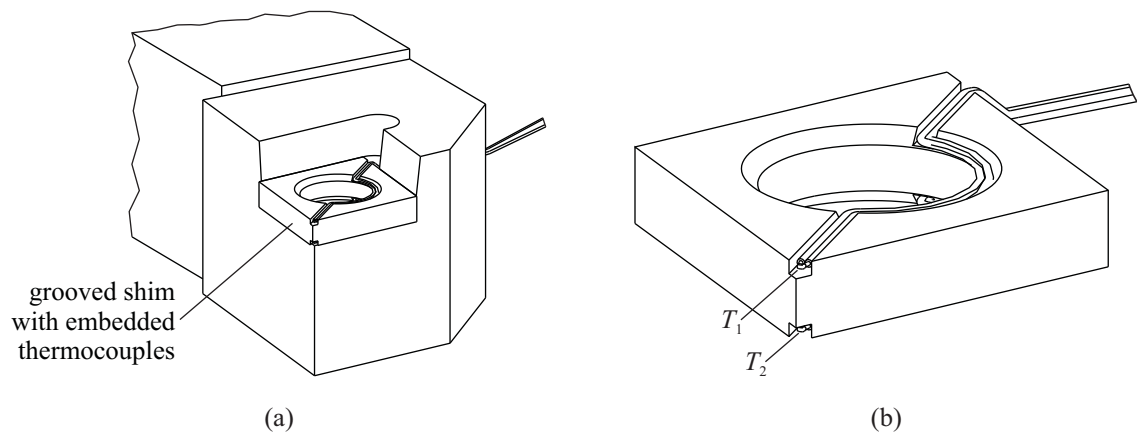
Location of thermocouples. (a) View of tool holder and grooved shim without the cutting insert. (b) Shim and embedded thermocouples.
